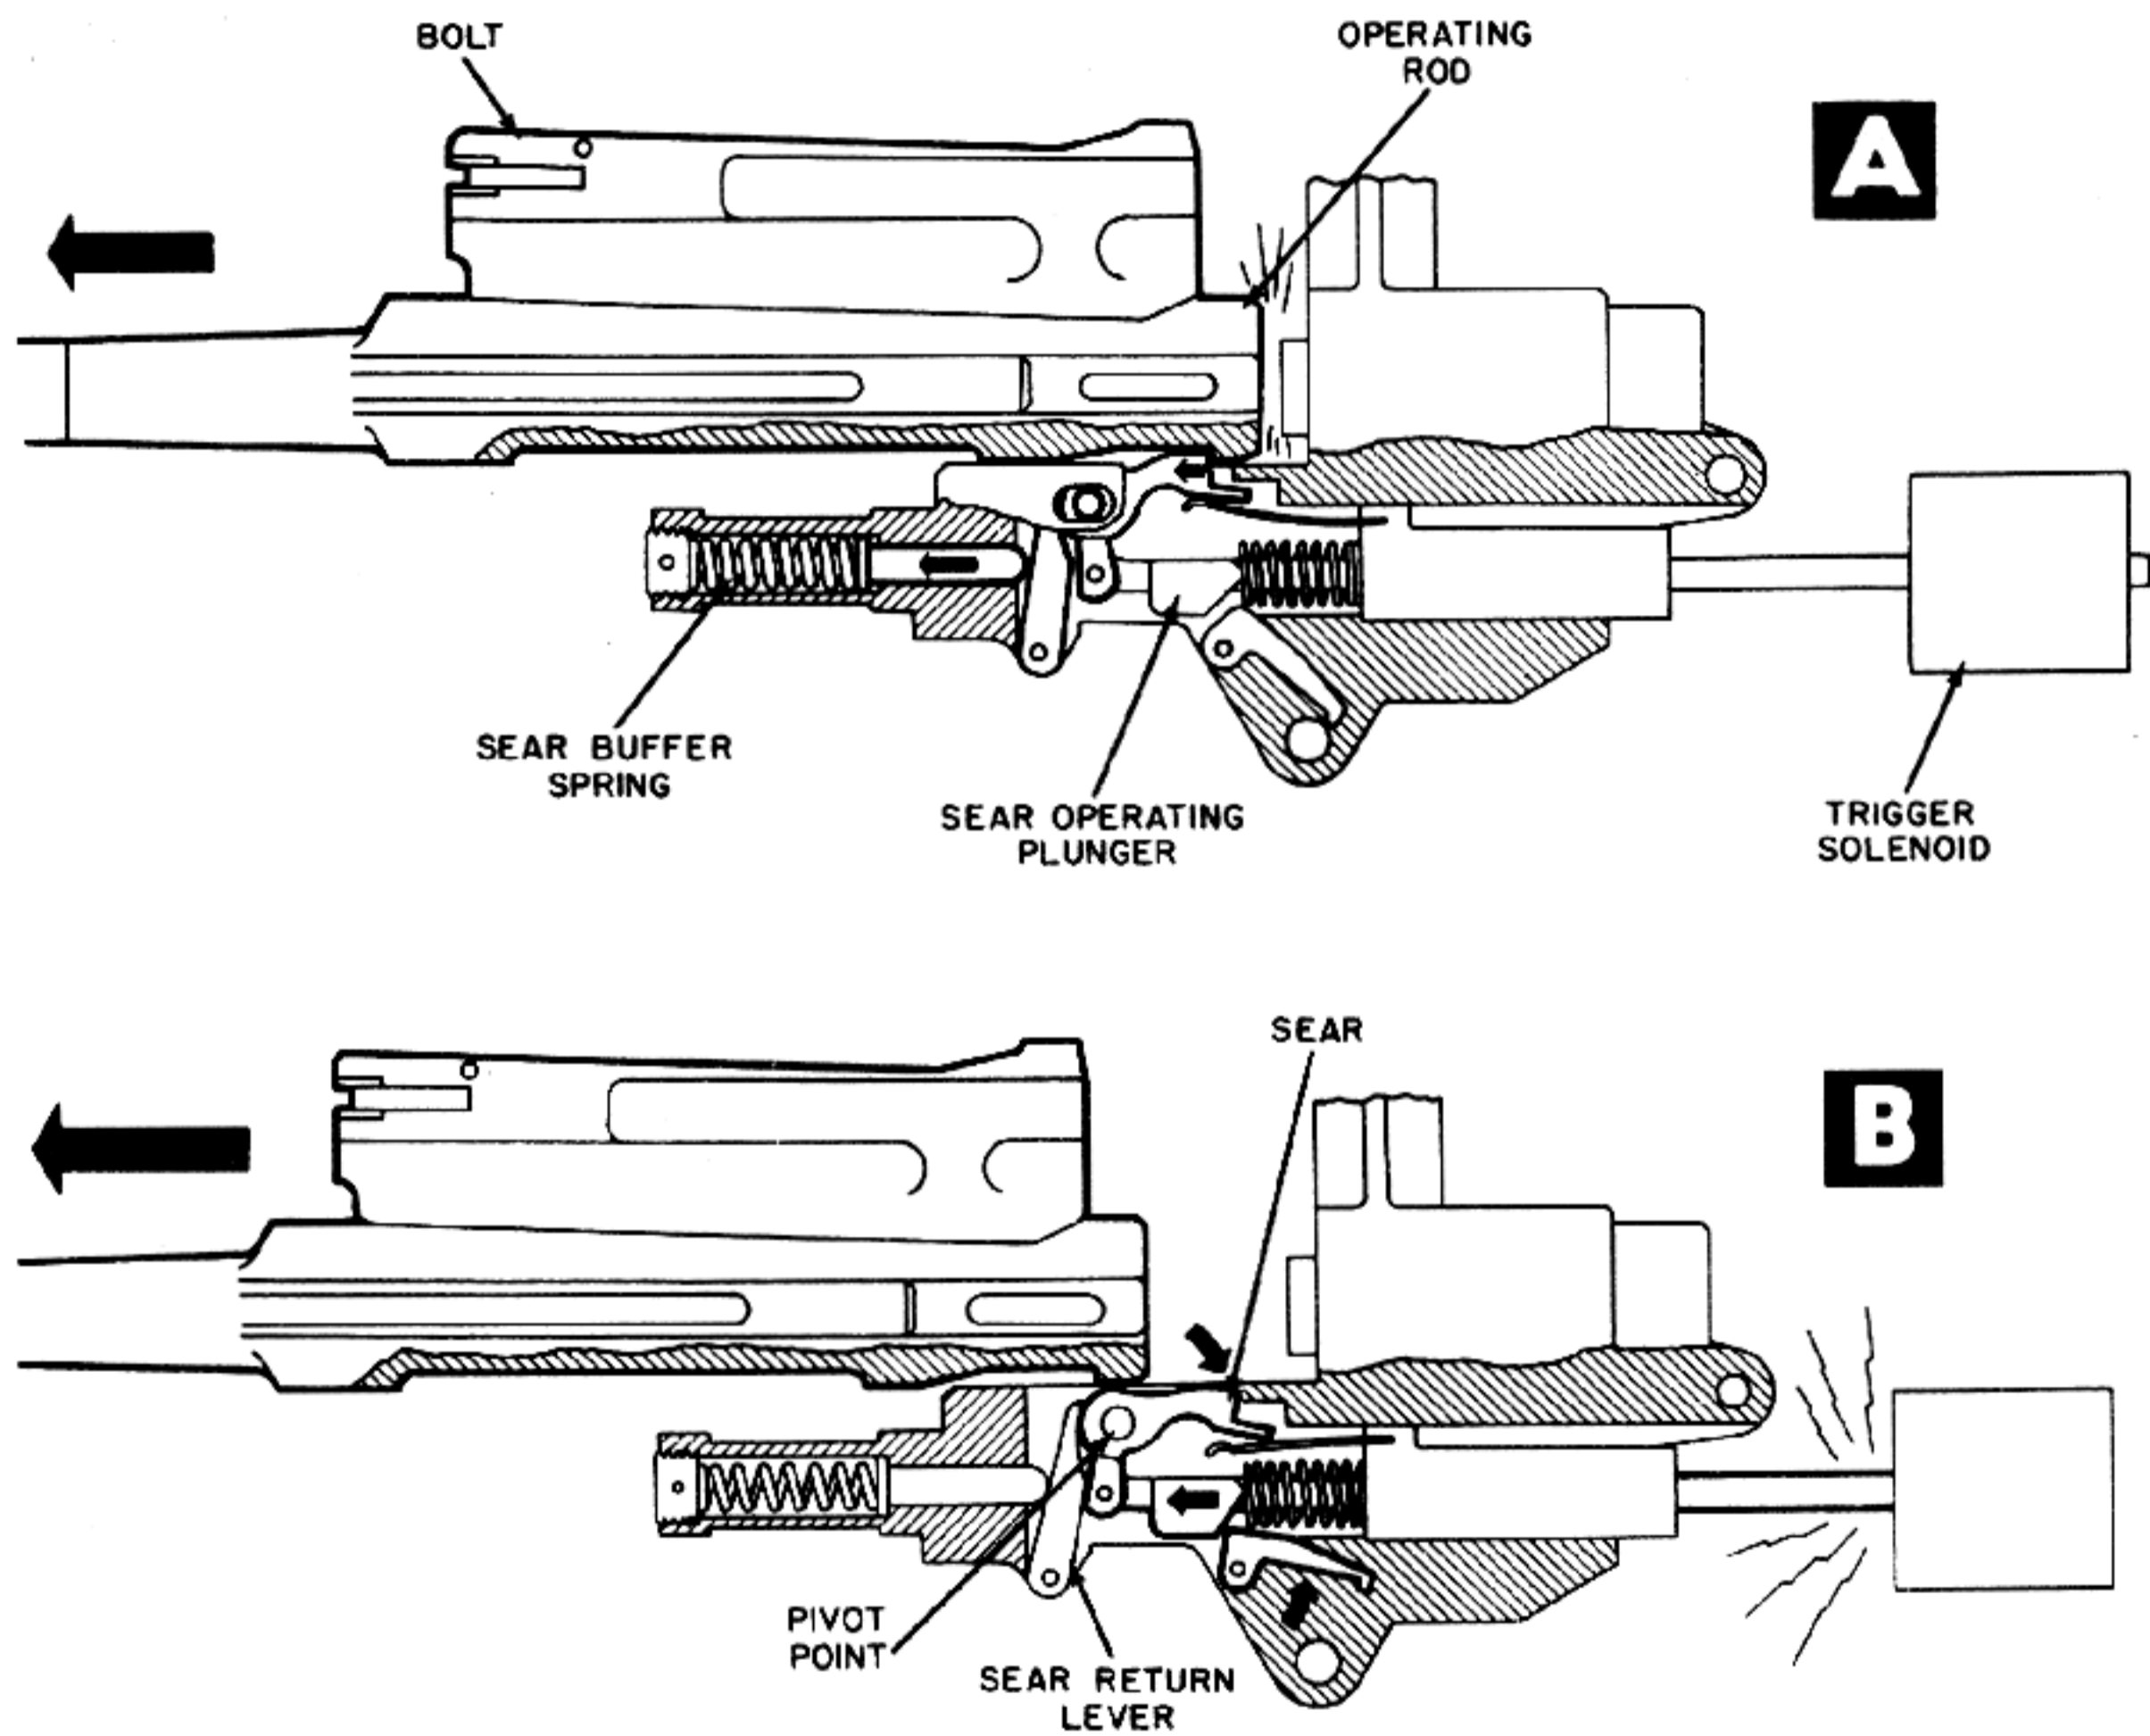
Operation of Sear Mechanism and Sear Buffer.
